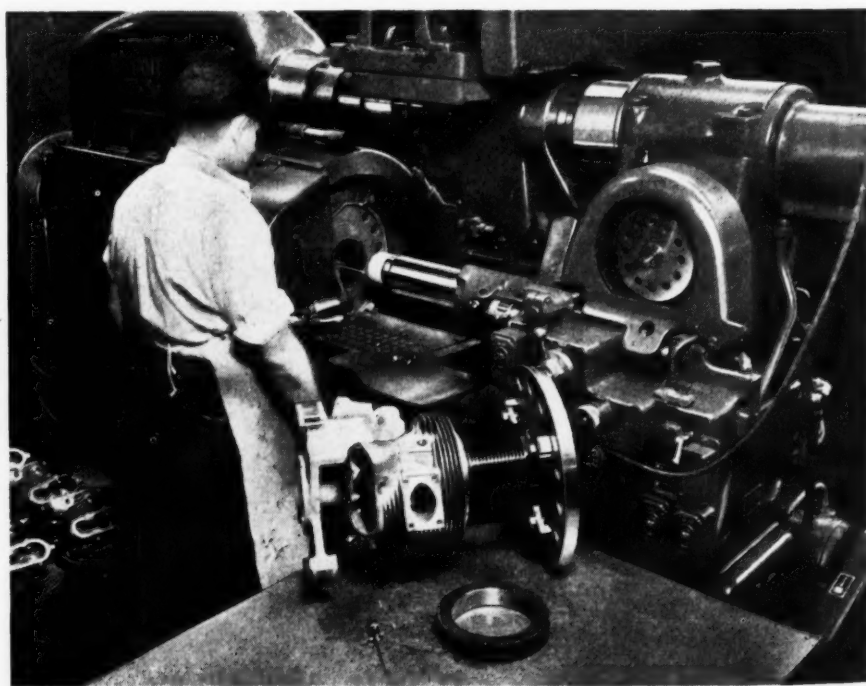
Chucking Grinder Employed for Rough- and Finish-grinding the Bore of Cylinder Barrels
